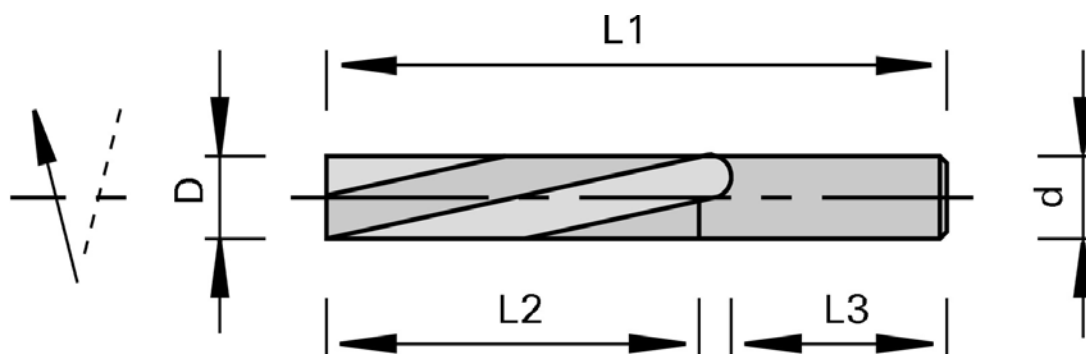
A Finishing cutter LEUCO VFW 178354. (<https://www.leuco.com/EN/US/web/home>).
